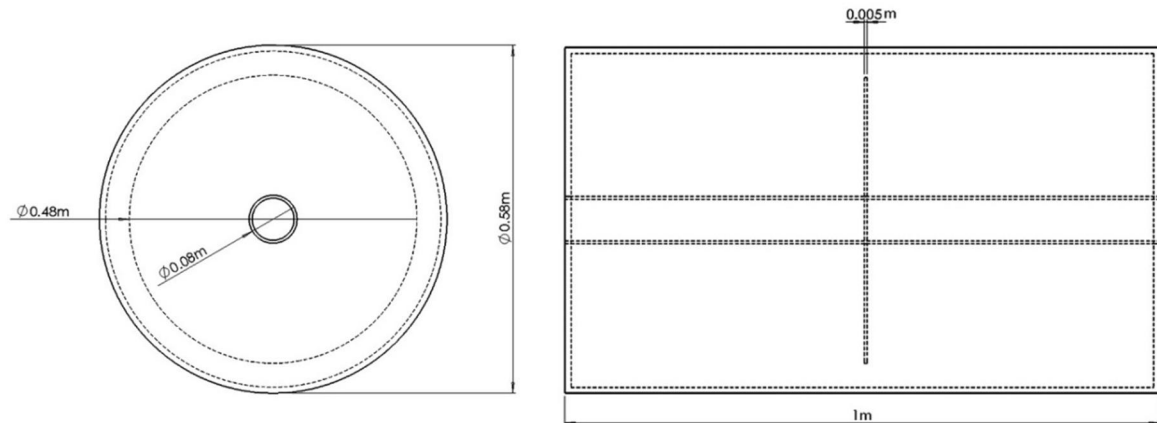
Front and top side drawings of the LHTES with single fin configuration.
